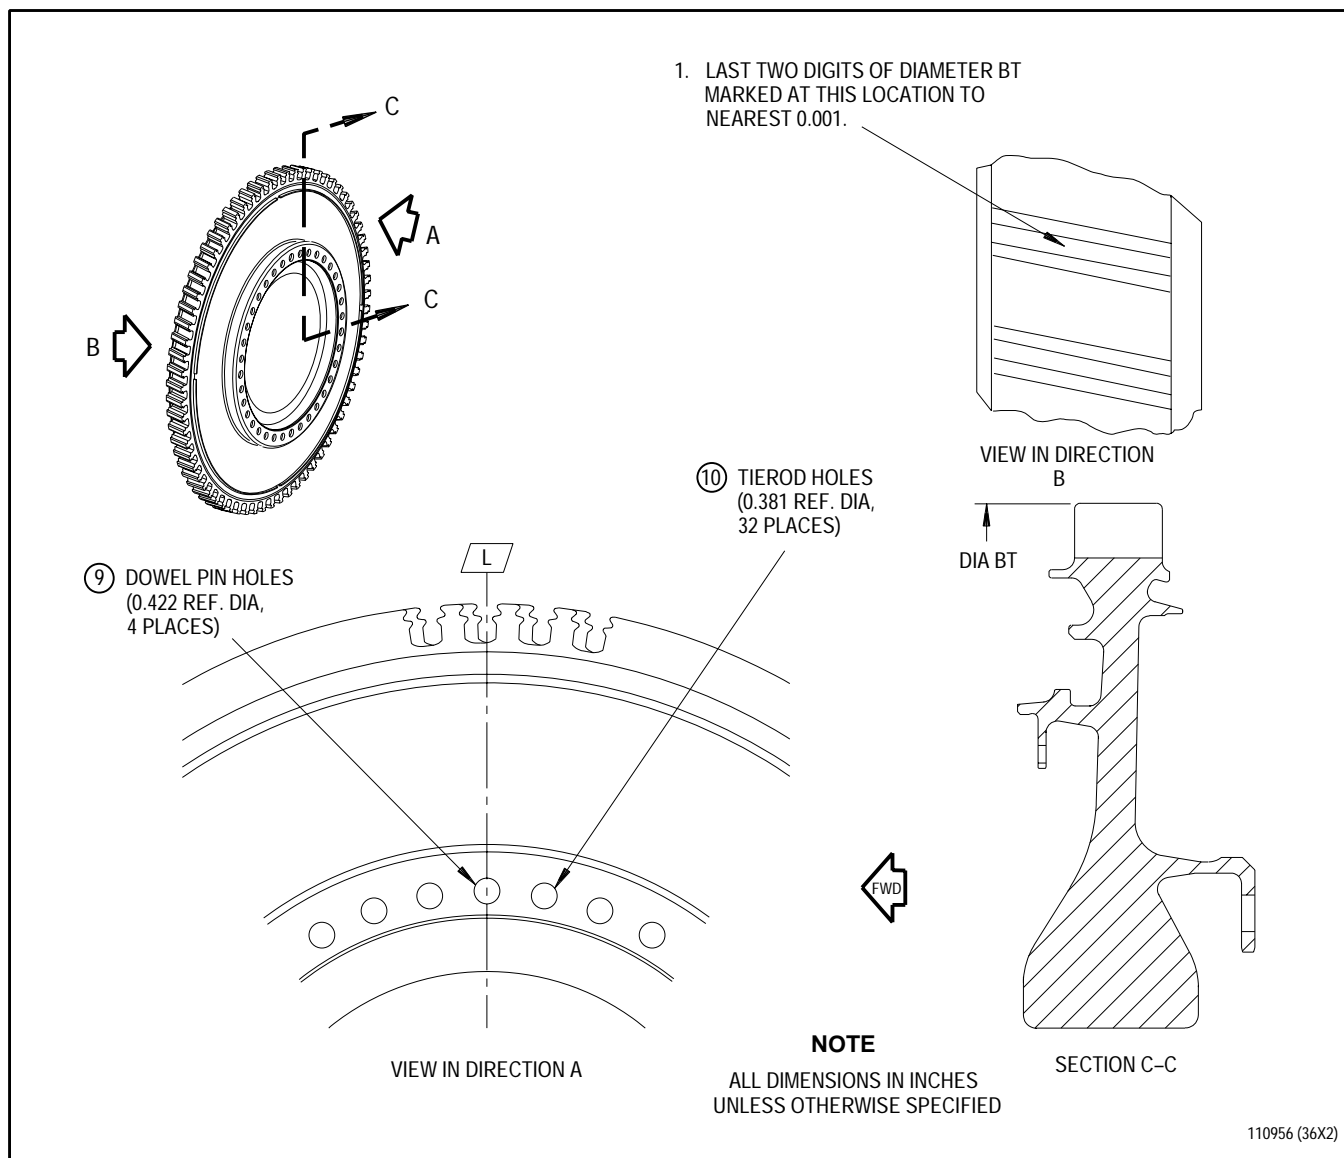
First Stage Turbine Disk - Inspection (Sheet 2 of 3)
